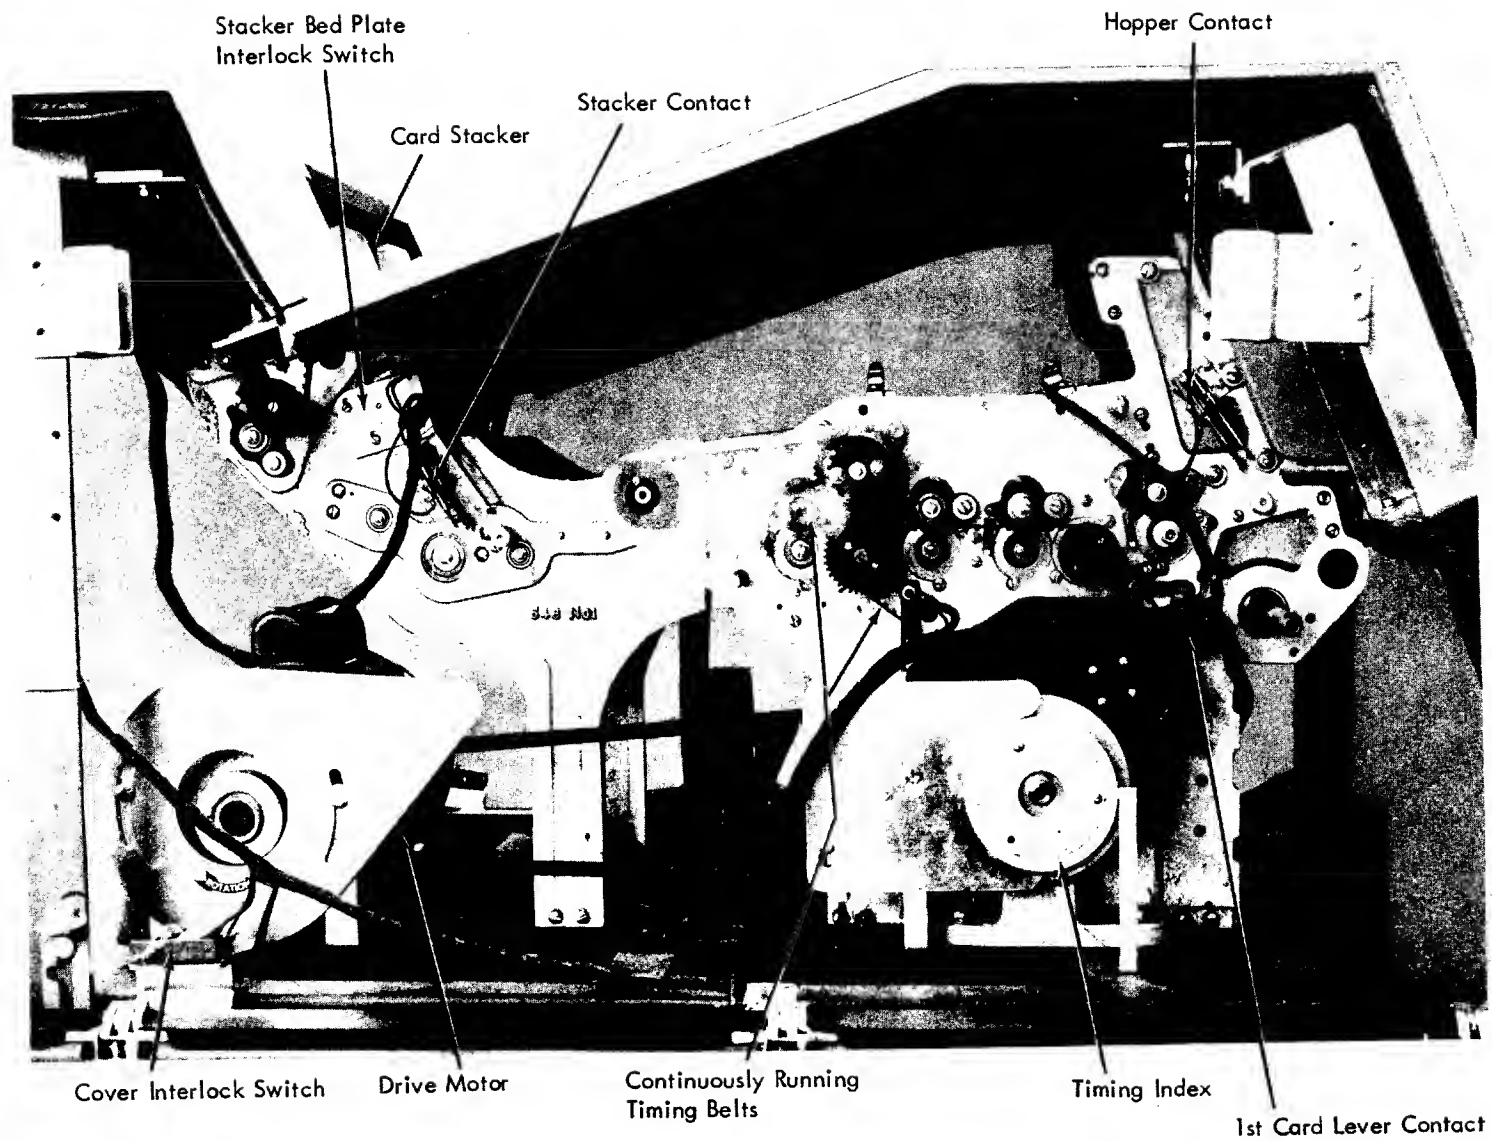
LEFT SIDE OF CARD READER
